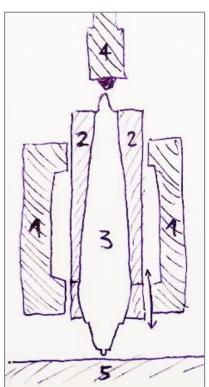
Parts of the pen fitting to the robot clamp.
